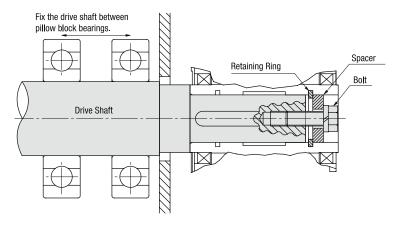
Attachment Using a Spacer and Retaining Ring (Customers need to provide their own spacers, bolts, and retaining rings.)
